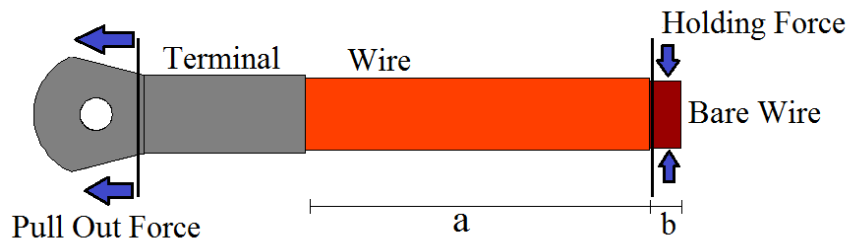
Configuration of pull-out test for terminal crimped over cables
